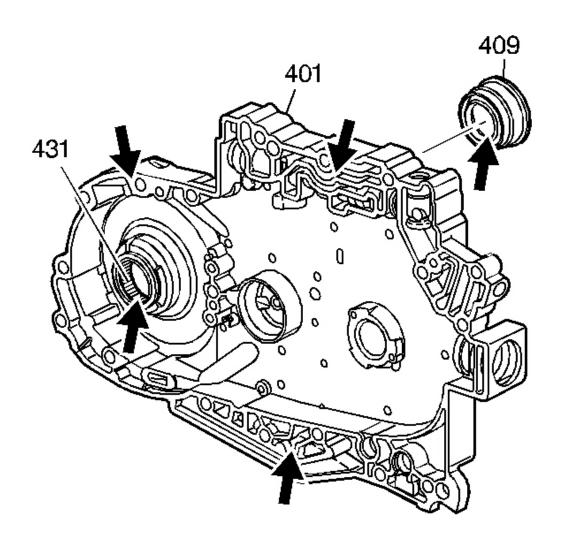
Locating Inspection Areas On Drive Shaft Bearing Assembly Courtesy of GENERAL MOTORS CORP.
